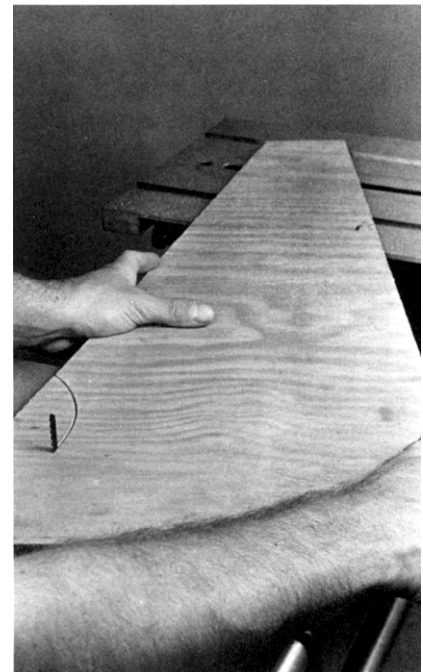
Doing sabre sawing with the jigsaw's arm removed. Work carefully so you don't bend the blade or cause it to move off the cut/me.
